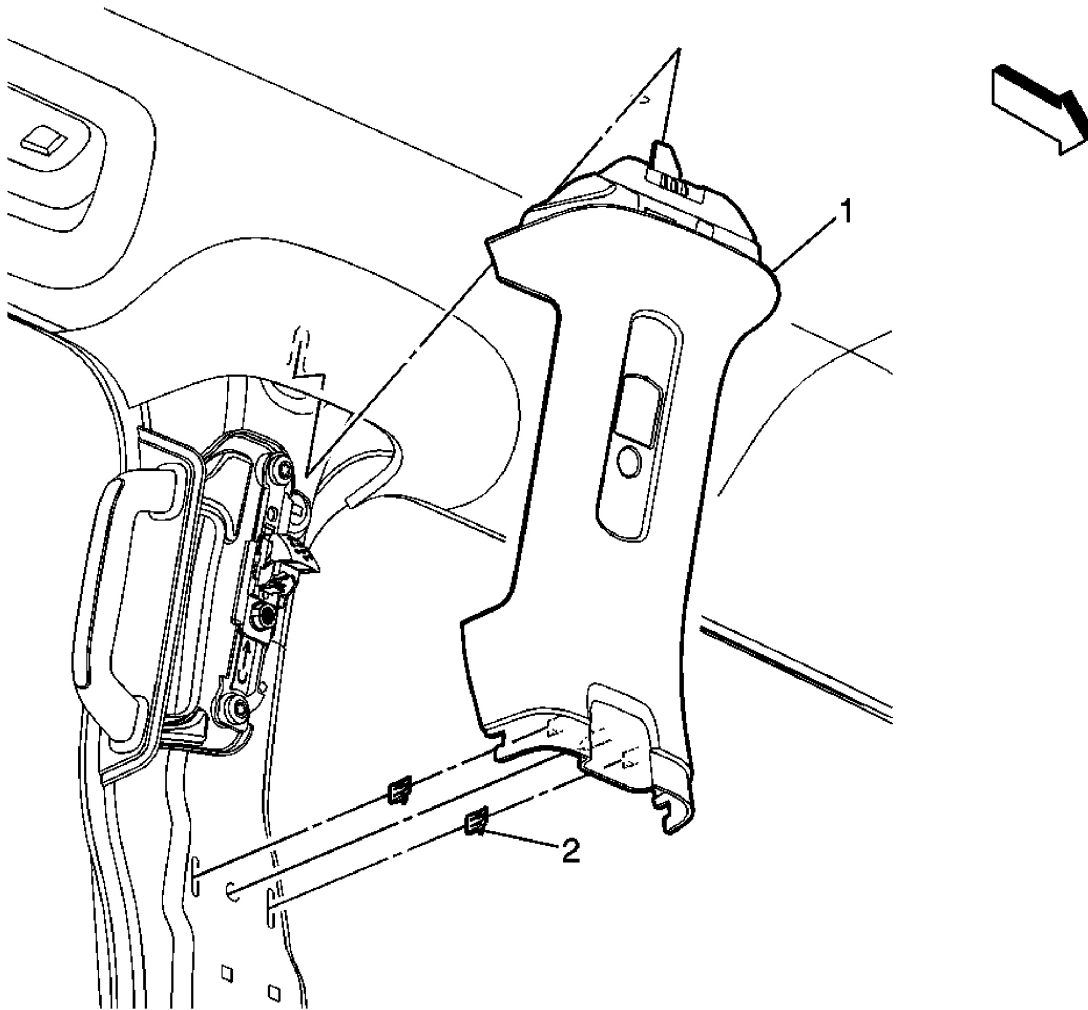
Body Side Rear Upper Garnish Molding Replacement
